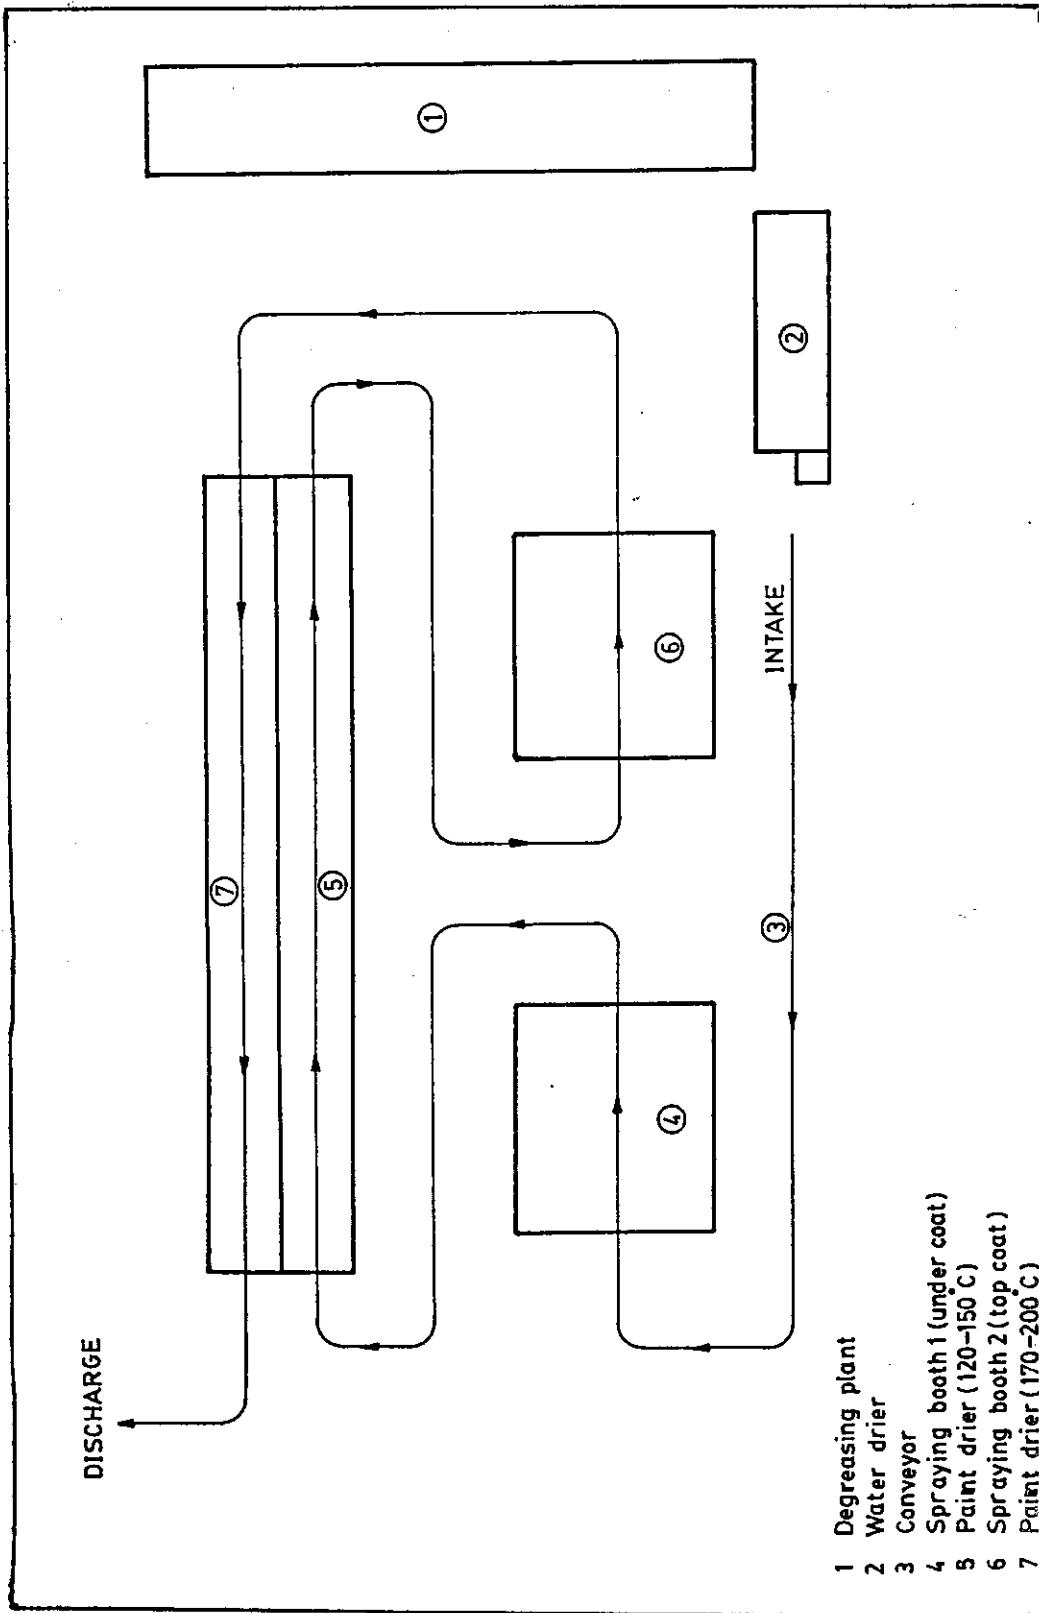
Painting Installation at Sanyo Electric Co., Ltd.
